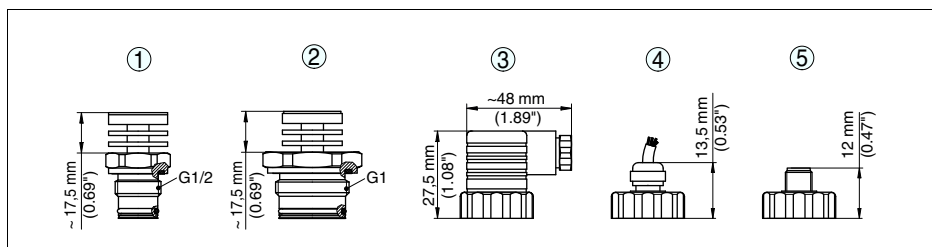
VEGABAR 17 - Cooling elements, plug, cable outlet
